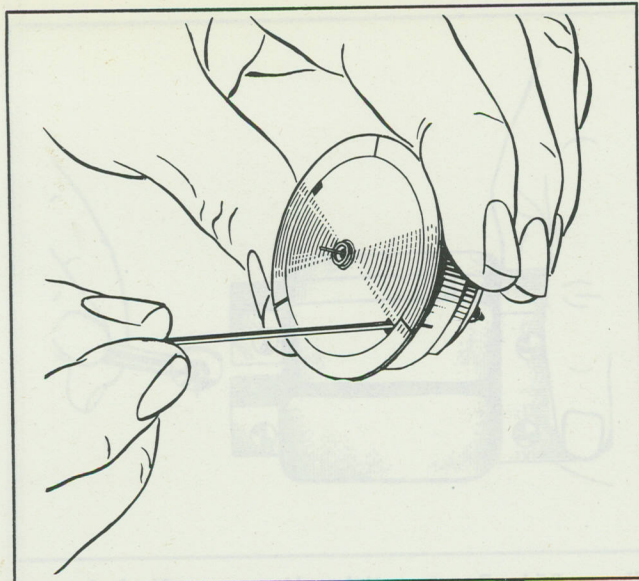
E—Removing Magnesyn Cover With Lifter, QB-8432-1
